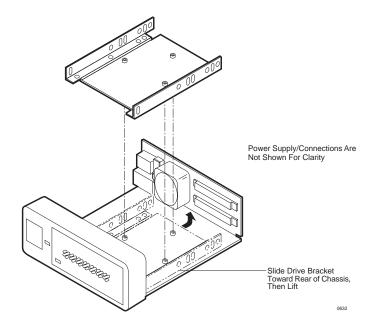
Removing the Drive Mounting Bracket (DS50 1-Bay Shown)
